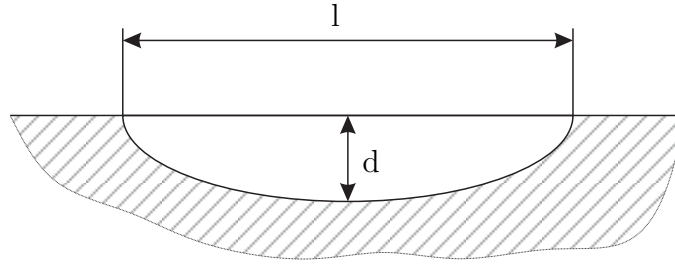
Schematical longitudinal cross-section view of a crack
